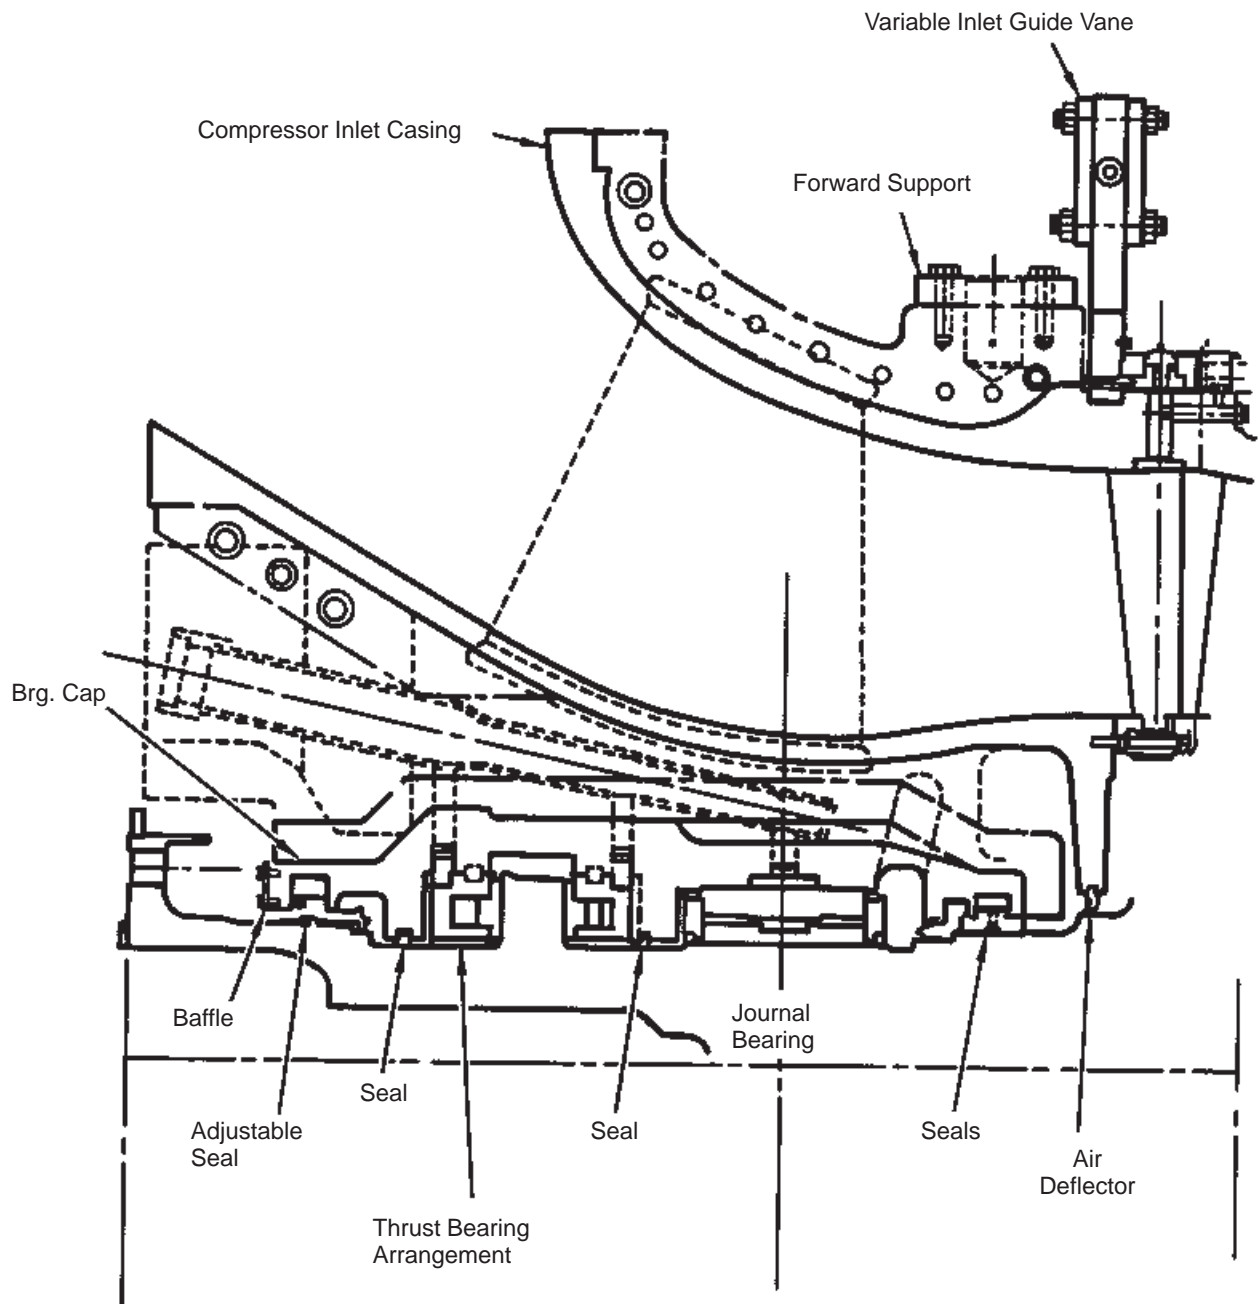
Compressor Inlet Casing and No. 1 Bearing Housing
